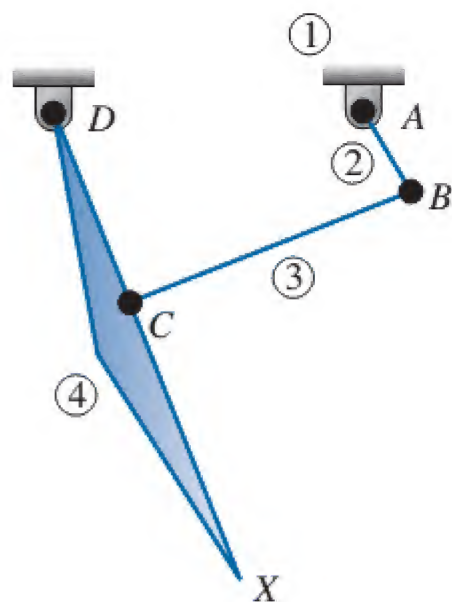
Nosewheel assembly for Example Problem 1.9.
